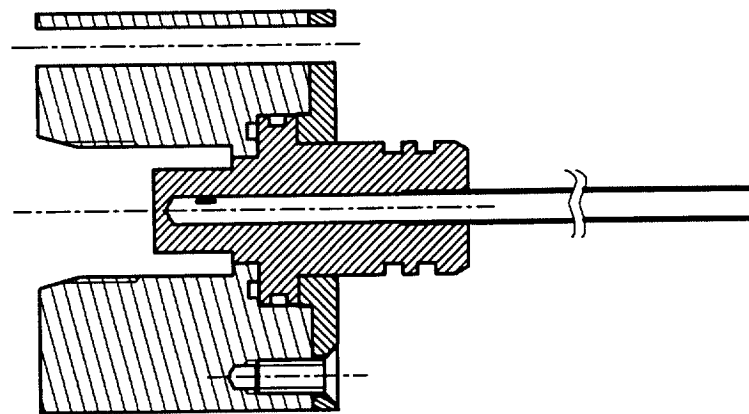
GO_2 post design for swirl coaxial injector. GO_2 post was designed to screw onto injector assembly shown in Fig. 2.2.1.
